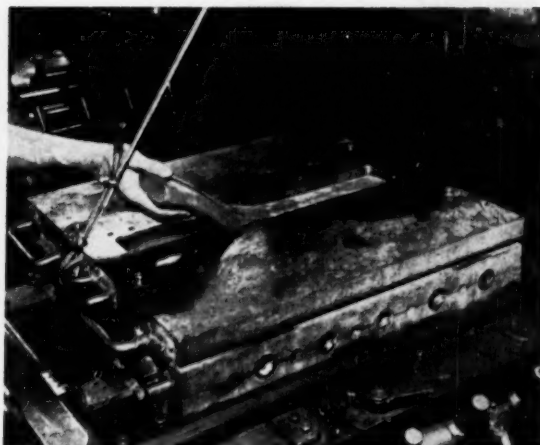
TRANSFER-TYPE MOLD BEING LOADED WITH UNCURED COMPOUND
